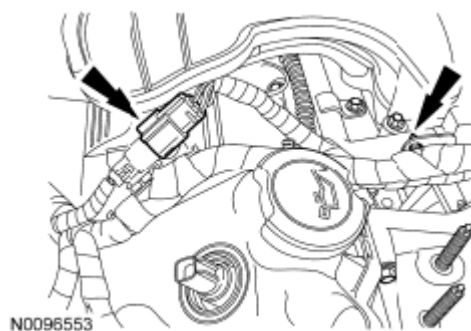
Locating Fuel Injector Wiring Harness Electrical Connector & Wiring Harness Retainer
